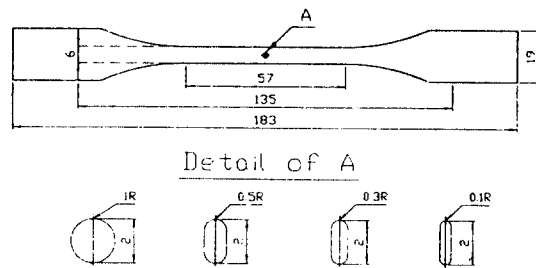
Configuration of notched tension specimen (dimension : mm)
